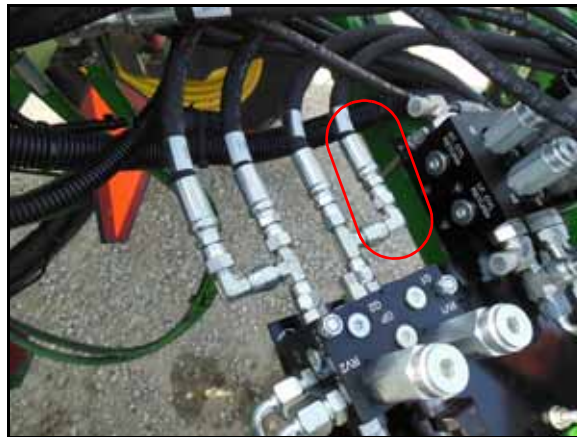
Cylinder Hoses Installed on UltraGlide XT Valve
